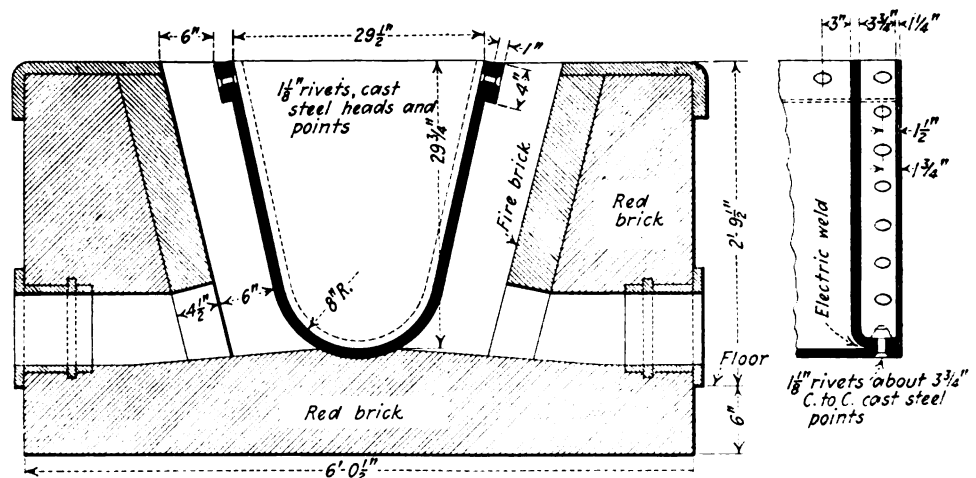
SECTIONAL VIEW OF U-SHAPED KETTLE AND METHOD OF INSTALLATION
